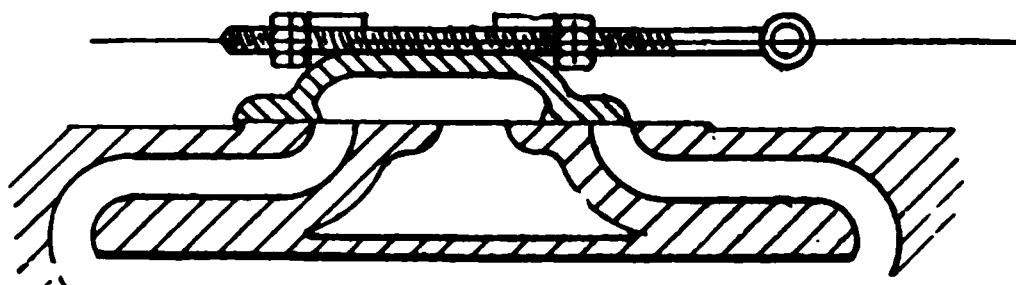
Slide Valve of a Steam Engine, showing position after cut-off of steam from right-hand end of cylinder, the exhaust continuing full from the left-hand end.
